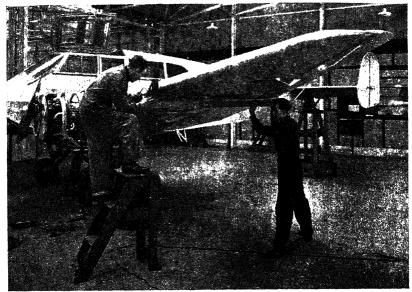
CHECK RIGGING DIMENSIONS (2).
